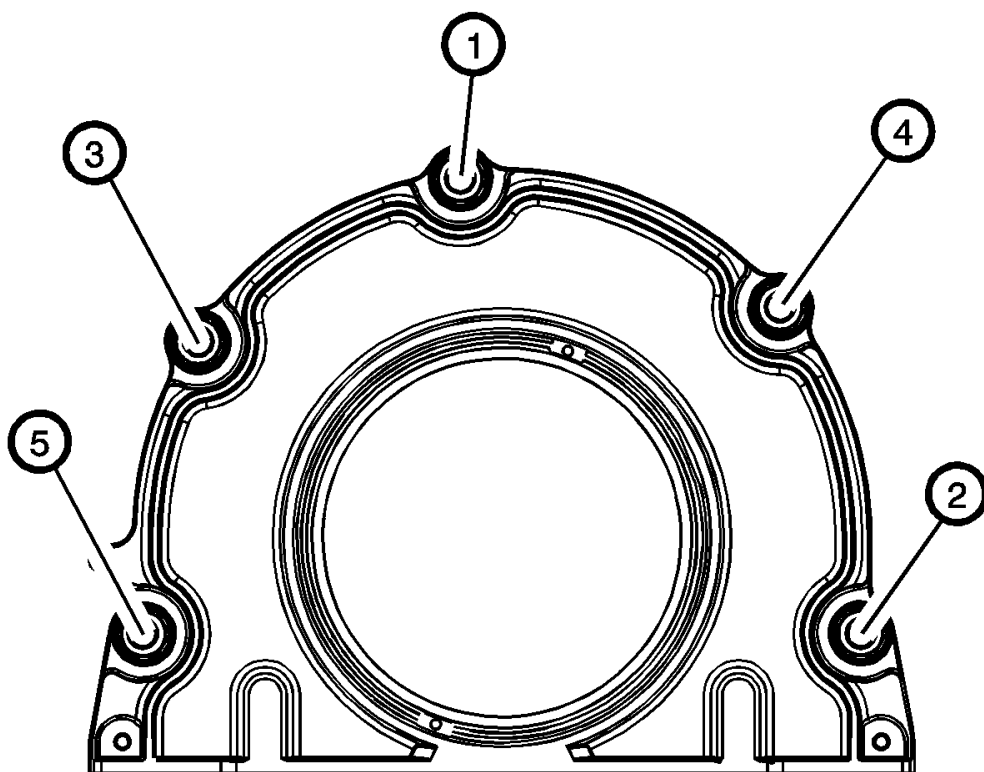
Crankshaft Rear Oil Seal Housing Bolt Sequence
